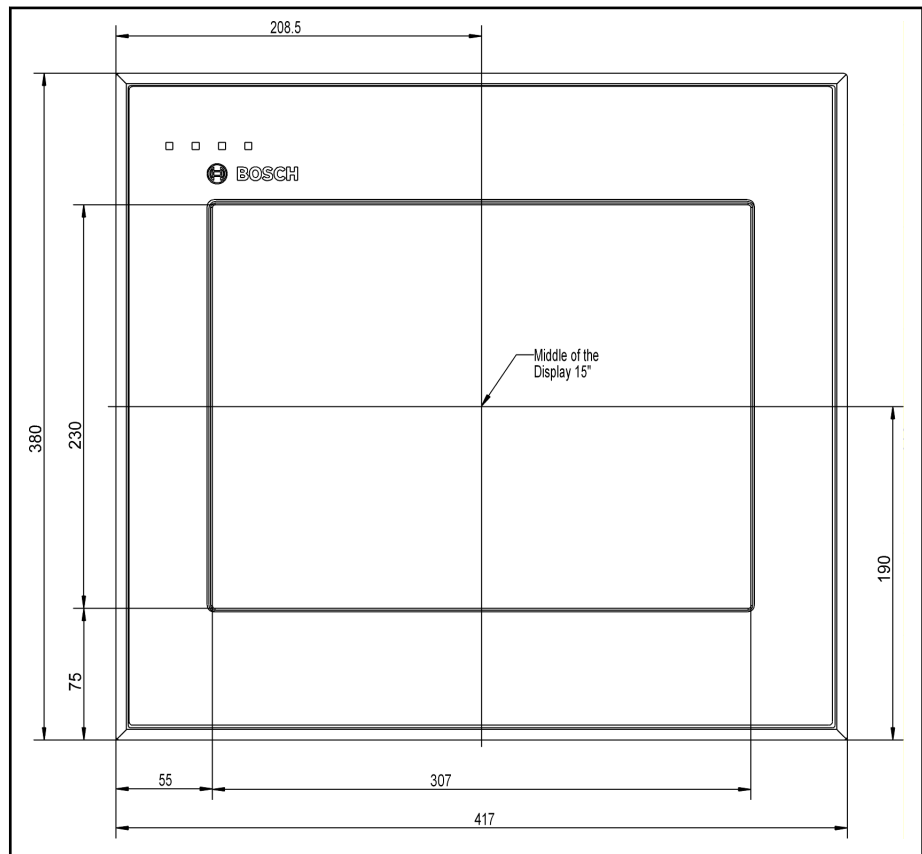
Dimensions: Front panel of the VDP 40.3AL devices
